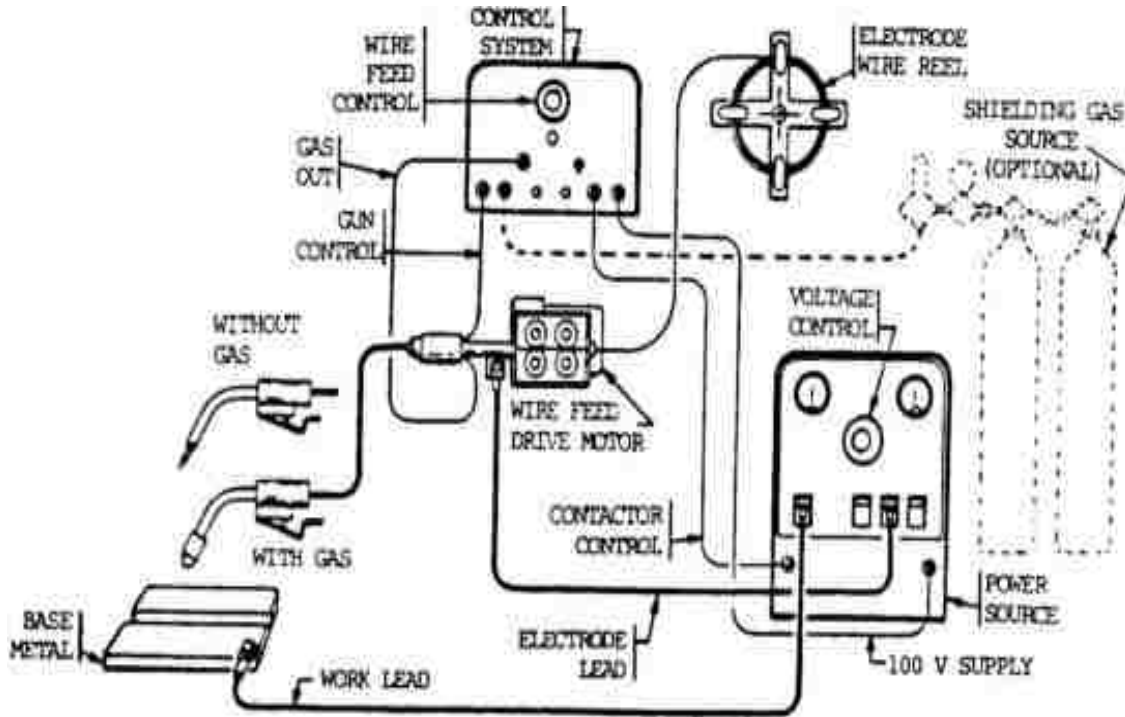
Schematic of the MIG Welding Process [24].
